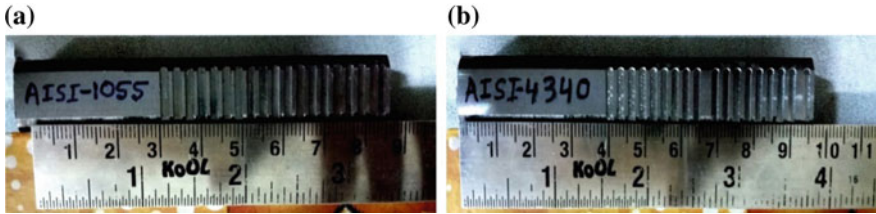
Machined slots on the workpiece of a AISI-1055 and b AISI-4340 steel
